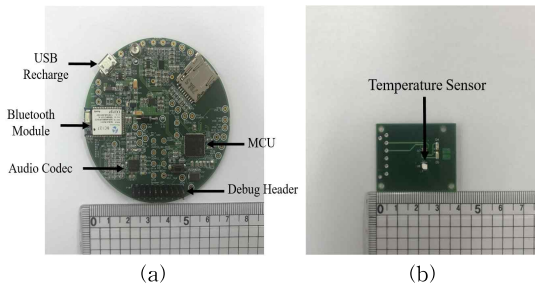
Manufactured PCBs of the proposed system. (a) Main board, (b) Sensor board.
